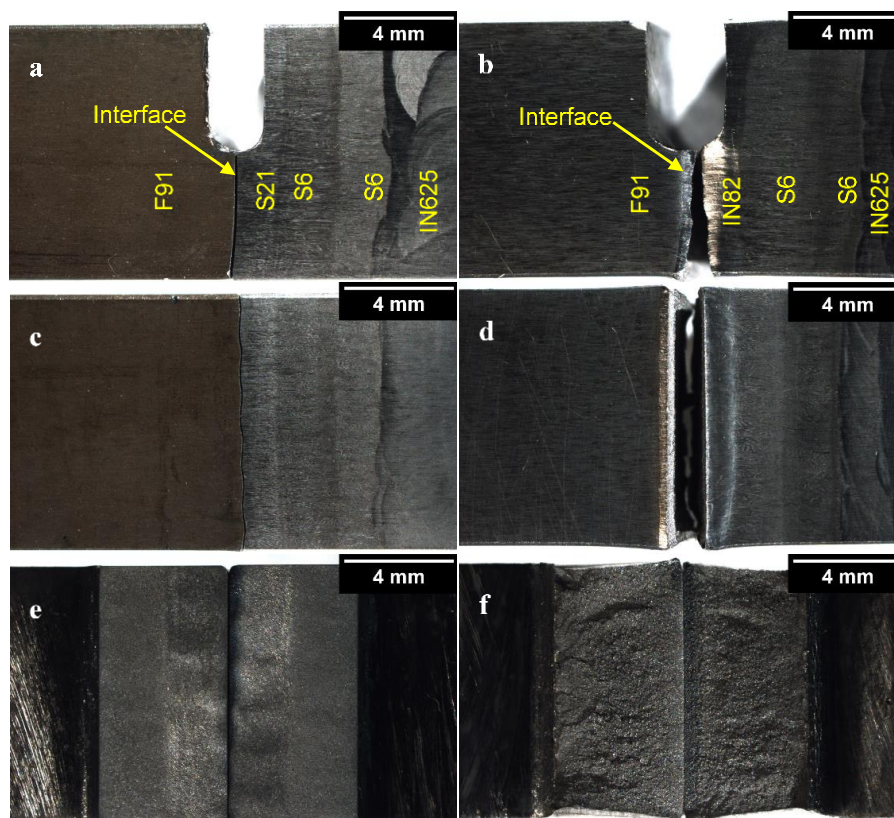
Fractured Charpy specimens after aging at 650 °C for 8760 h: representative cross-sections (a) S21 and (b) IN82; representative back-faces (c) S21 and (d) IN82; representative macro-fracture surfaces (e) S21 and (f) IN82.
